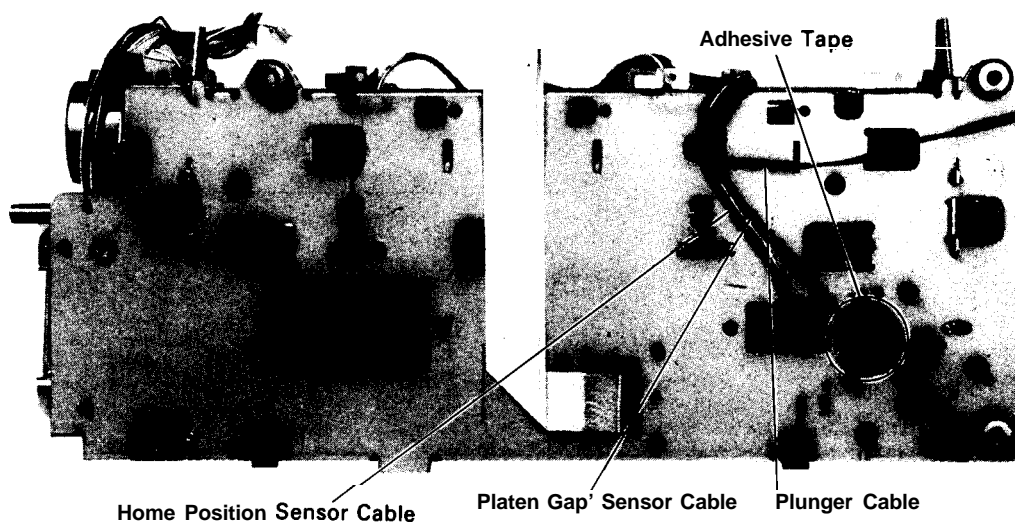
Adhesive Tape and Cable Positions on the Base Frame
